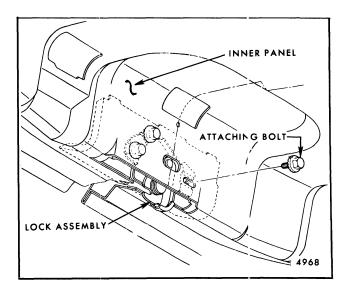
Typical Rear Compartment Lock Mounted in Lid
